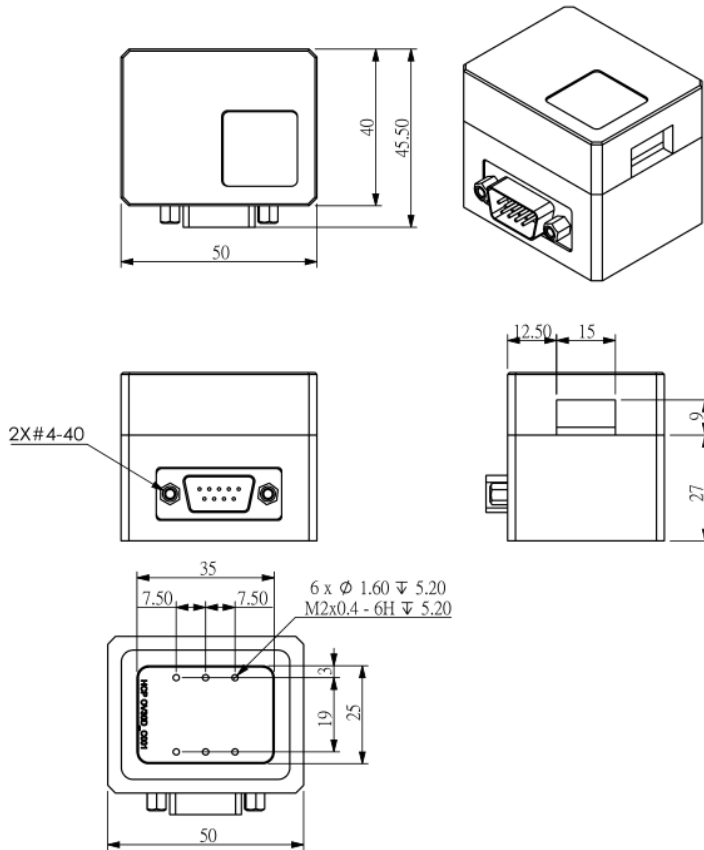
Mechanical drawing of OV-30D (Unit : mm)
